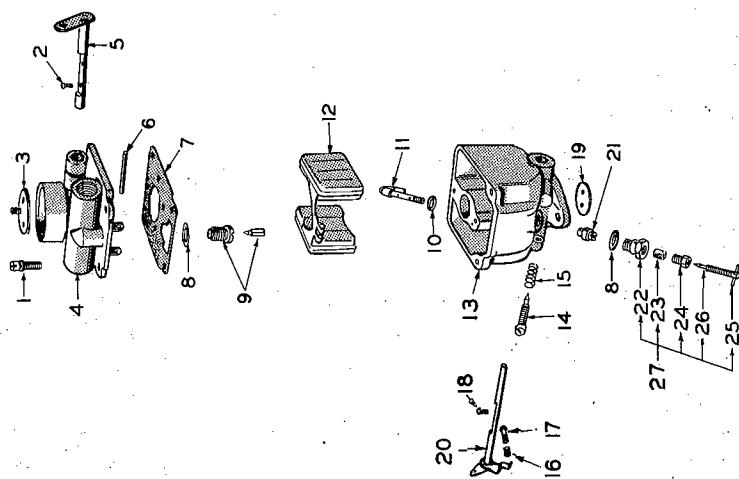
CARBURETOR PARTS GROUP (PARTS KEY NOS. 4, & 5)
